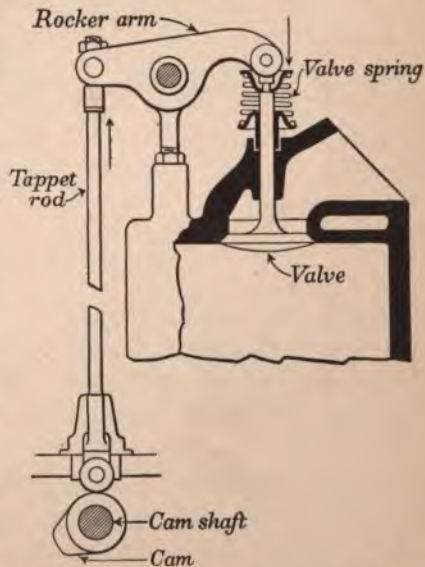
Overhead valves operated by tappet rods from camshaft below
